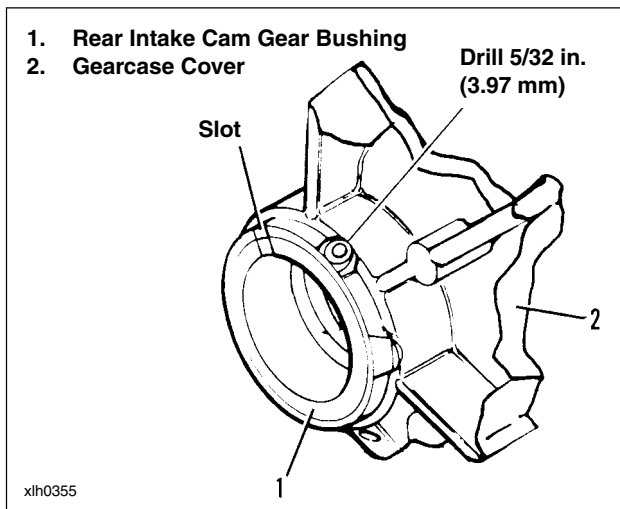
Rear Intake Cam Gear Bushing Installed in Gearcase Cover
